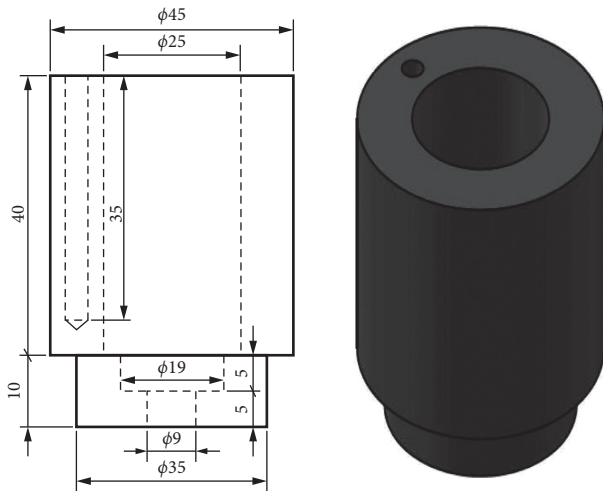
Dimensions ((a), unit: mm) and schematic (b) of the outer crucible.
